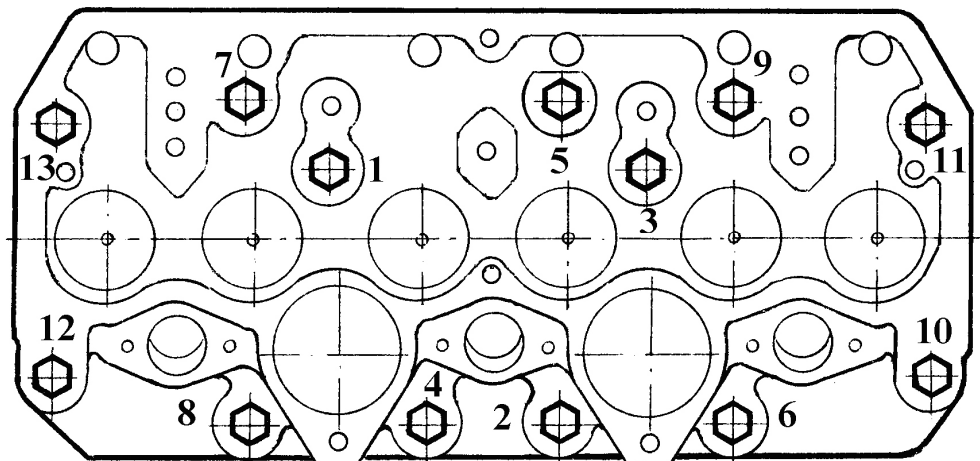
Sequence scheme of cylinder head retaining bolts tightening
